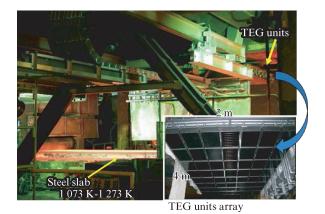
Appearance of a thermoelectric power generator installed in a continuous casting machine
